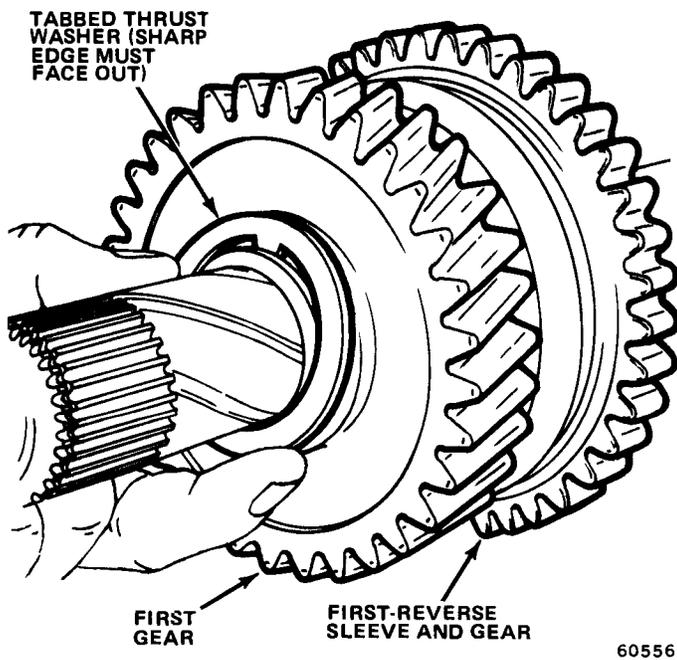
Installing First Gear Thrust Washer on Main Shaft
